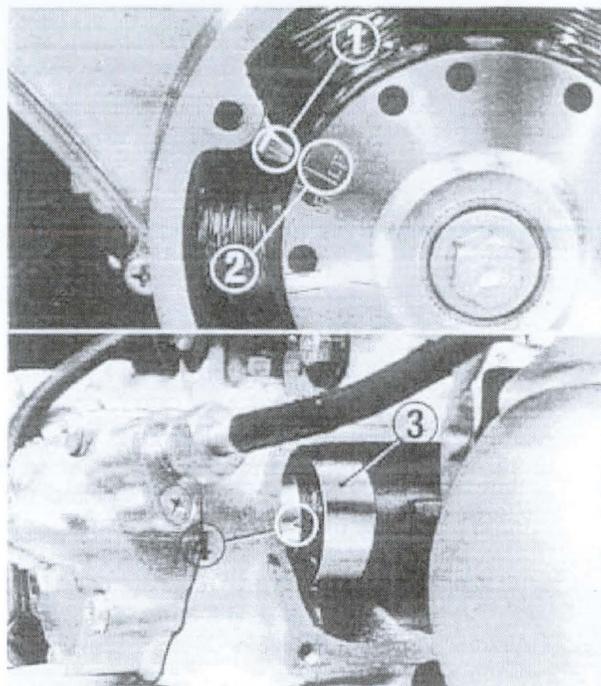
(1) Index mark (2) "LT" mark (3) Camshaft (4) Matching mark
